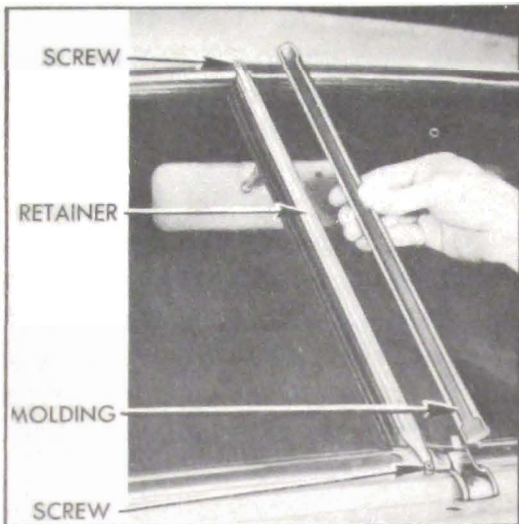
Removal of Center Division Outer Molding and Retainer—1949 Series 50-70
